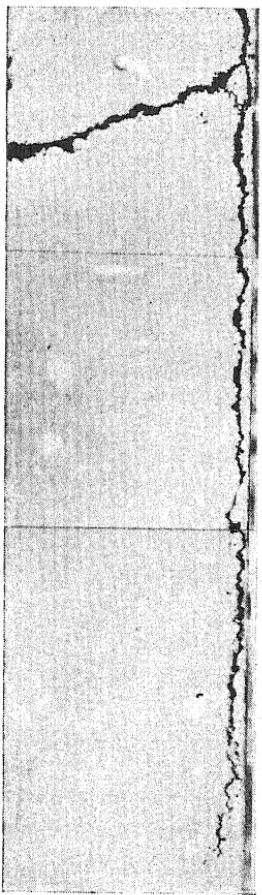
Cross-Section of a Cracked Whitemetal Coating
